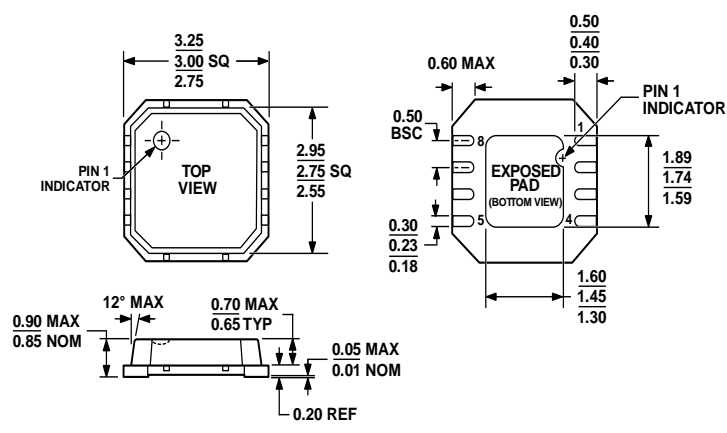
8-Lead Lead Frame Chip Scale Package [LFCSP_VD]
